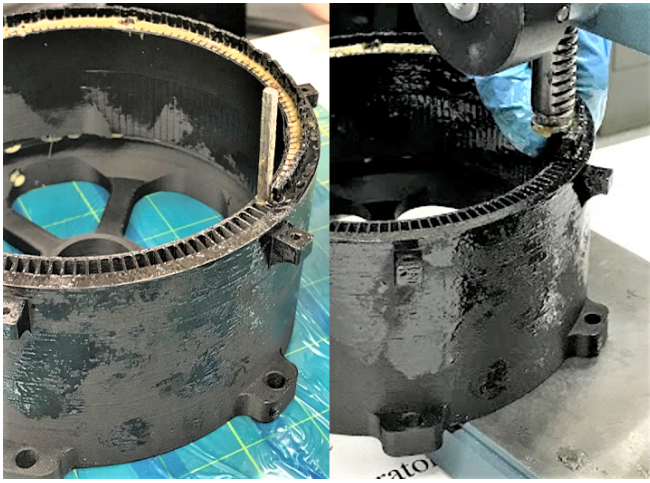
PT-2 ring gear mid-assembly process showing magnet located in slot without locating post on the left and being pressed into location with locating post on the right.
